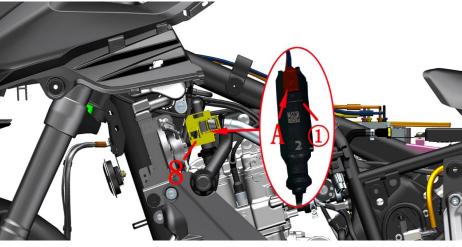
FRONT FORK		Robe sensor component	CHK	40)
